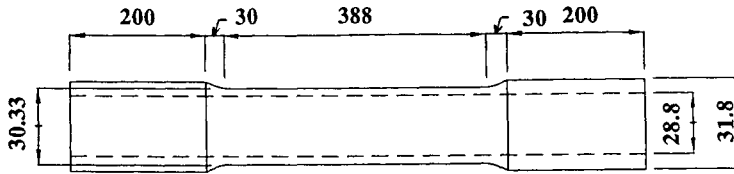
Geometry of thin-walled tubular specimen (all dimensions in mm)
